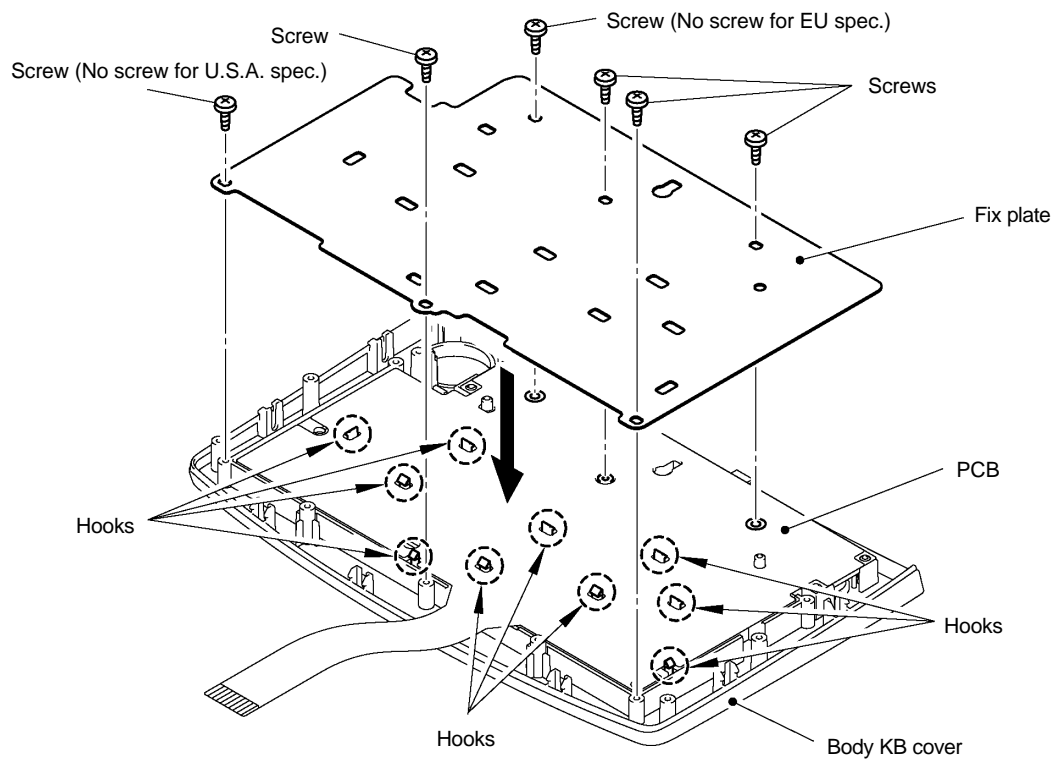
Reassembling the KB Unit/Rubber Key Unit (4)
